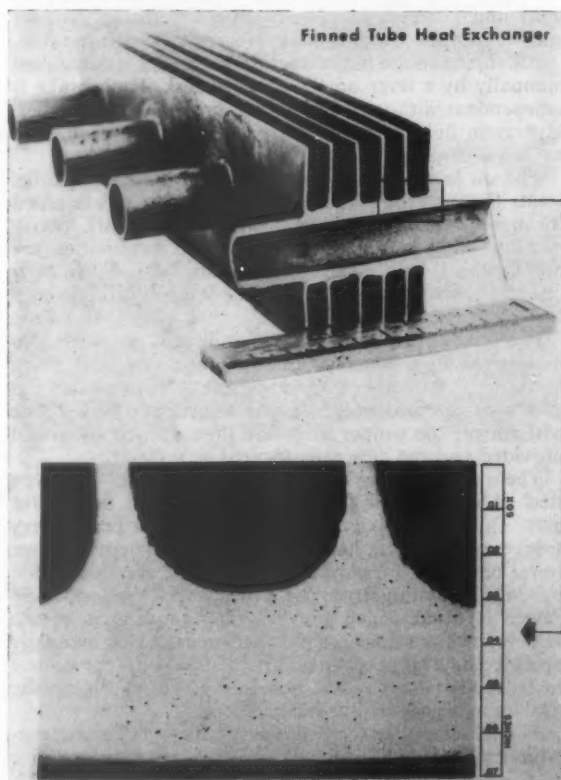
Section of a finned tube heat exchanger and micrograph of brazed joint between tube and fin. Ni-P brazing alloy. Etched with glyceric-regia
